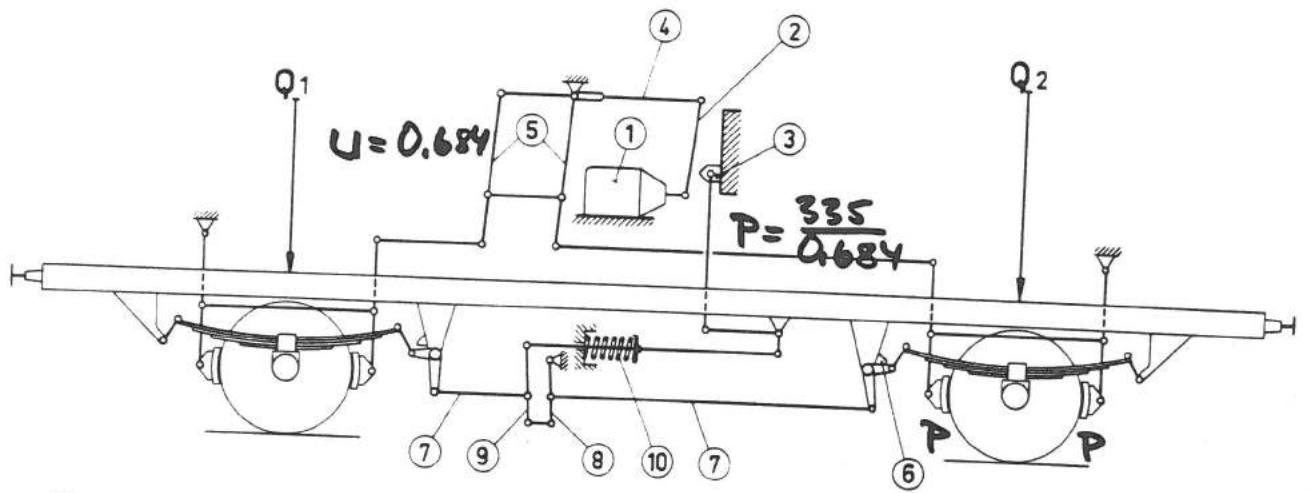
Arrangement showing principle of the SAB Load Brake Adapter type AC3.
